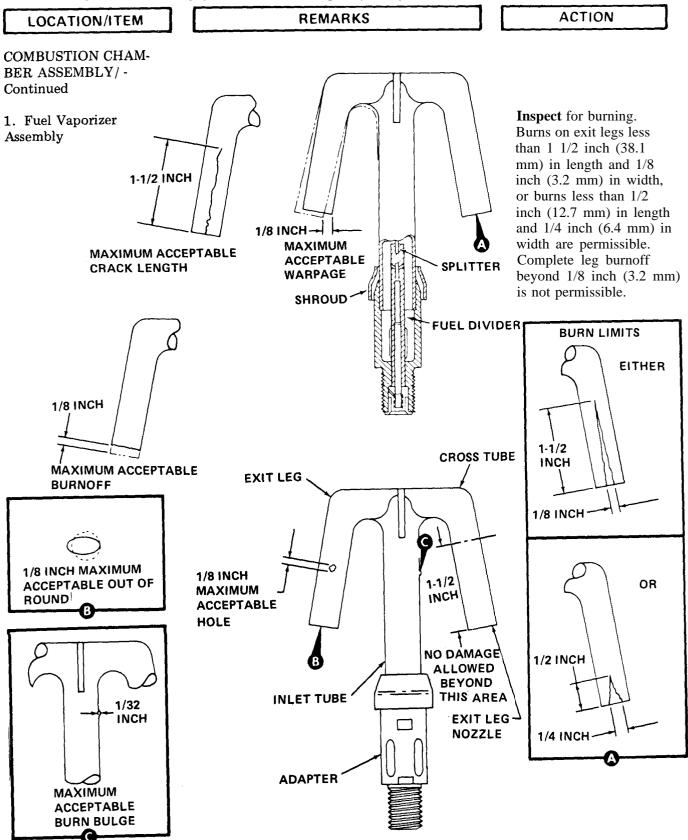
DETAIL A AND B WILL BE MEASURED BY USING 1/4, 1/2, 1/8 AND 1-1/2 INCH. SCRIBE MARKS ON UPPER END OF GAGE
